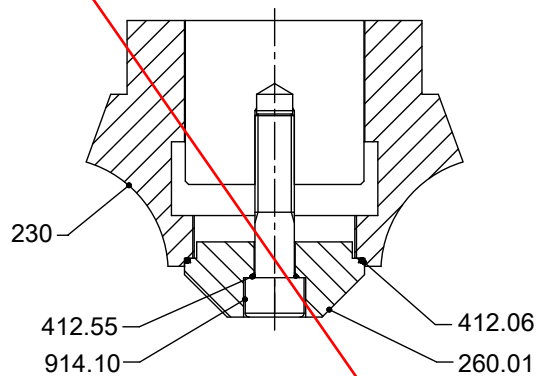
Impeller fastening elements M100 × 2 (for hydraulic systems K 500-632, K 500-640)
